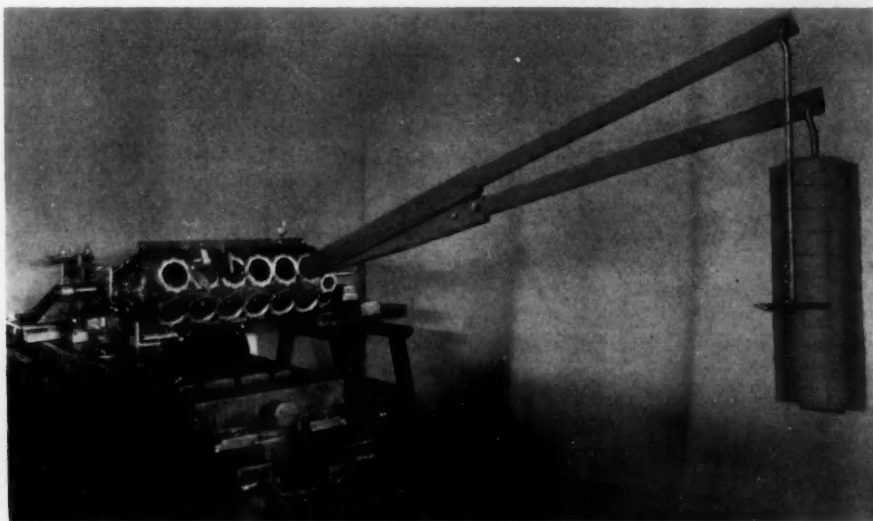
TORSIONAL TEST OF LIBERTY-ENGINE CRANKSHAFT IN A CRANKCASE
